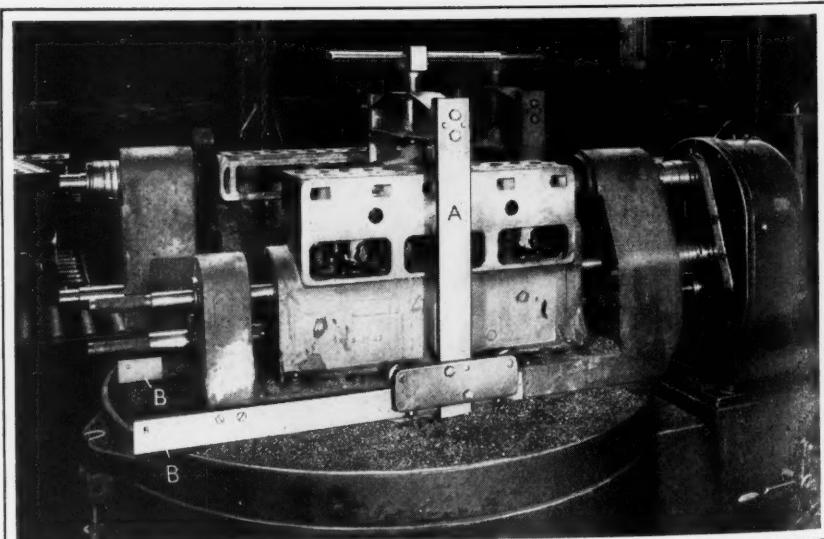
Boring Camshaft and Crankshaft Bearings, and Water-pump Chamber
